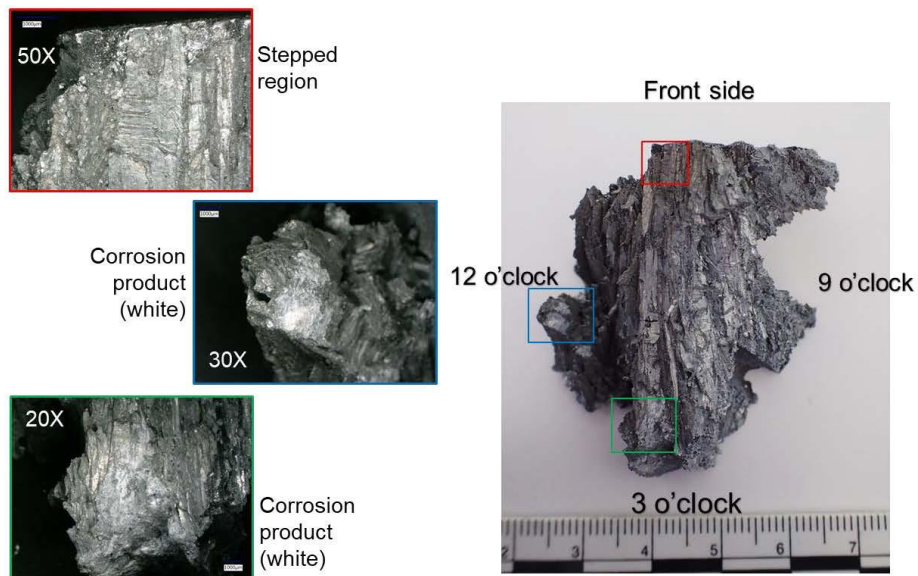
Examining the faceted surface on the casting cap side of Piece 3-1 by stereomicroscopy, revealed a stepped region, characteristic of zinc brittle fracture, along with lots of white corrosion product, most probably zinc oxide.
